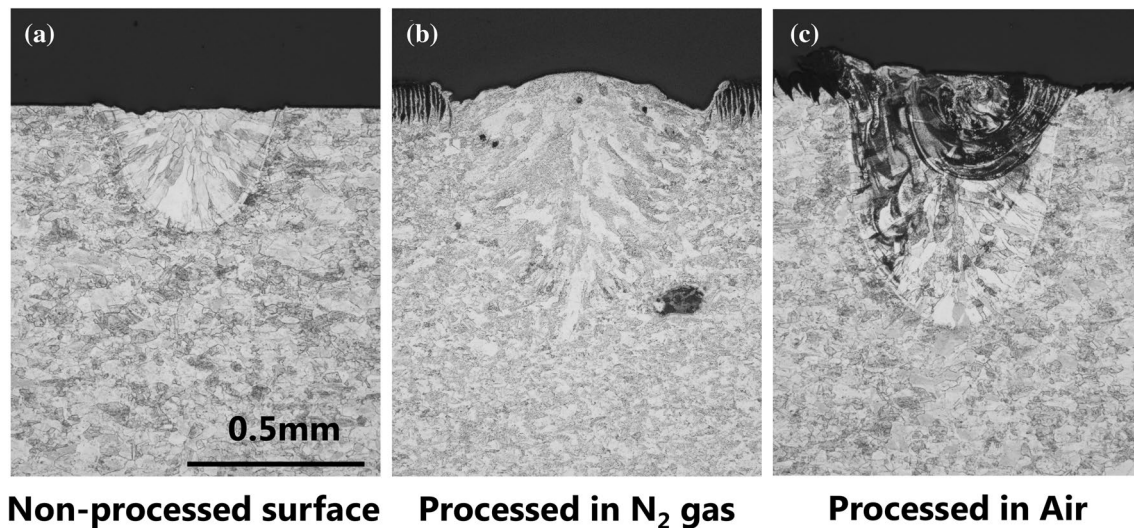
shows the microscope images after laser welding to non-processed copper surface and the figure on the right side shows welding to blackened copper surface fabricated by the scan speed of 10 mm/s.
